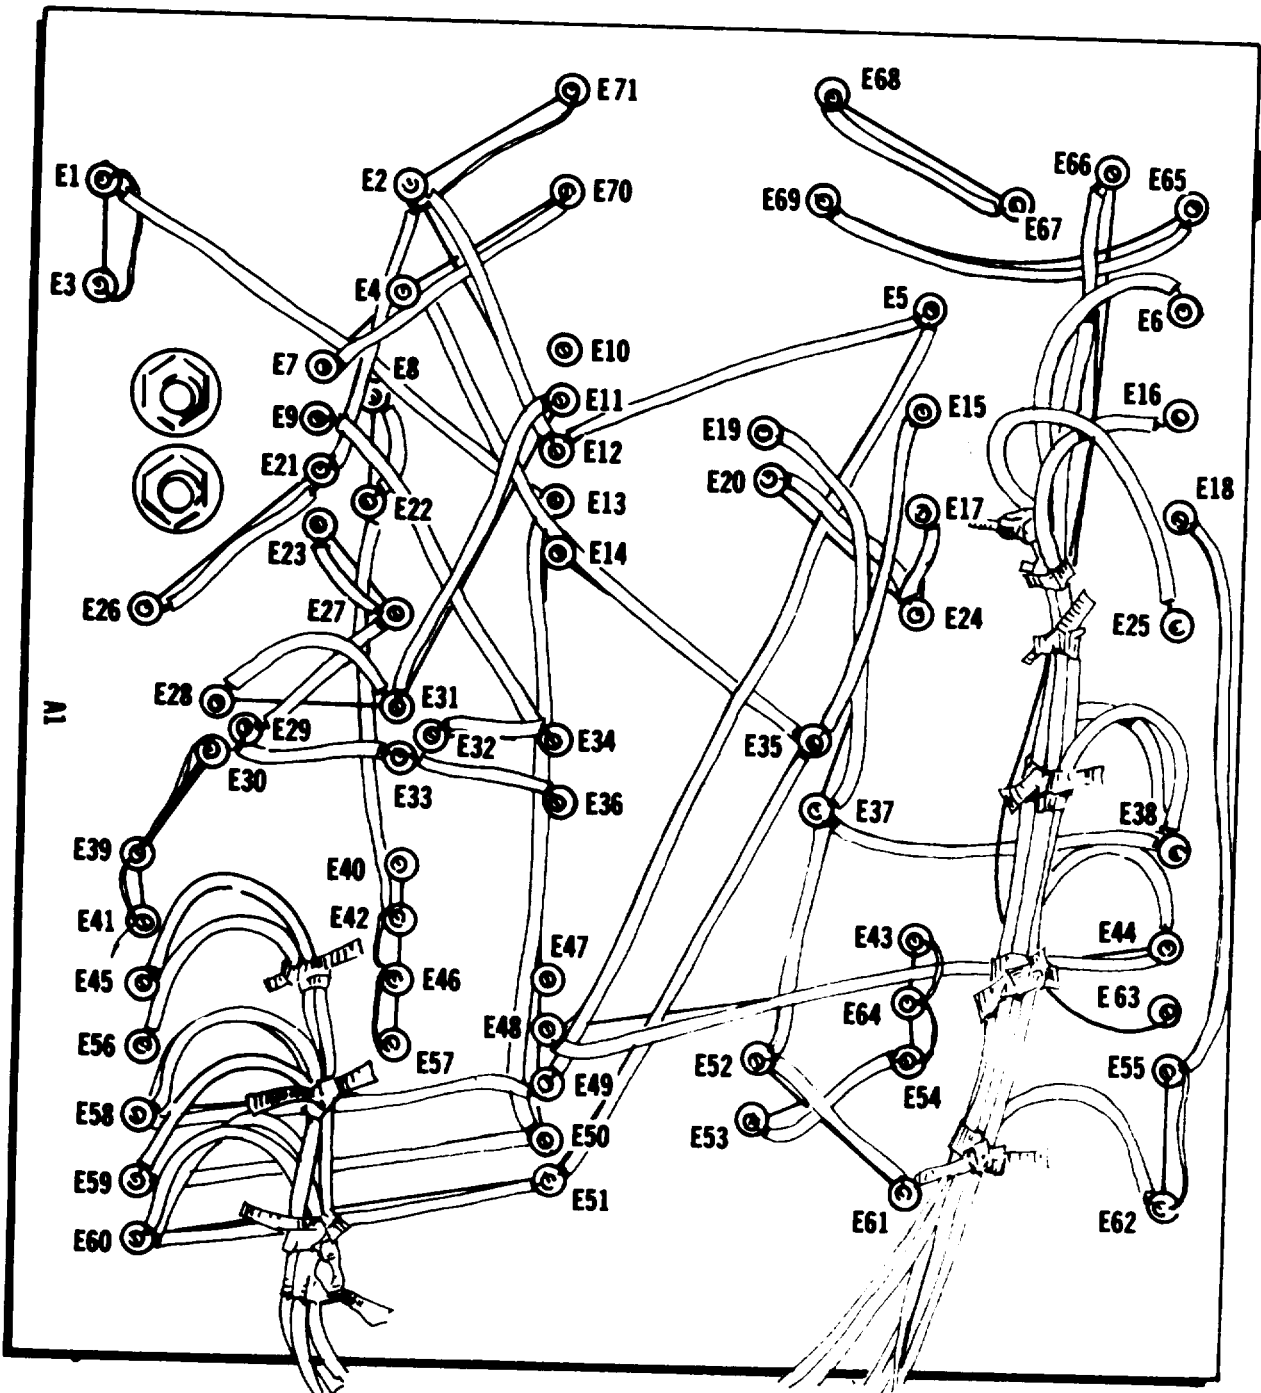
Component Board A-1, Front View (Sheet 1 of 2)
